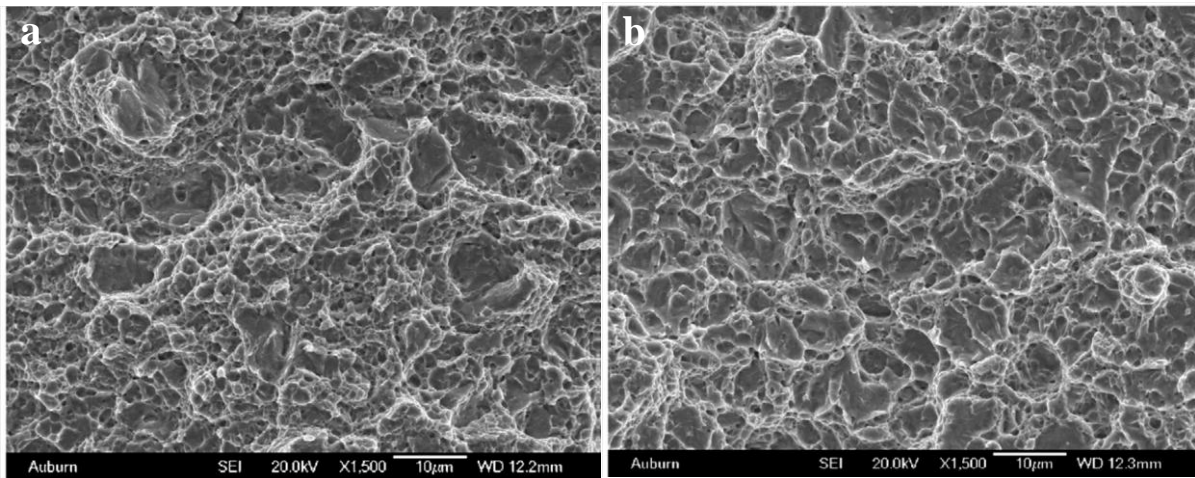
Fracture surface of a non-embrittled sample exposed to 500ppm H₂O₂ for 4.8 h exhibiting ductile failure by microvoid coalescence. (a) Fracture surface near (with 150 μm) the notch root. (b) Fracture surface approximately 5mm away from the notch root
